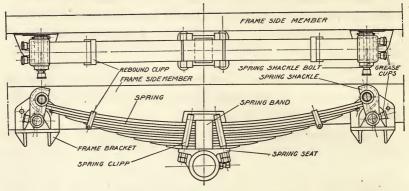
DeKalb Spring Mounted Outside of Frame and Over Axle.
